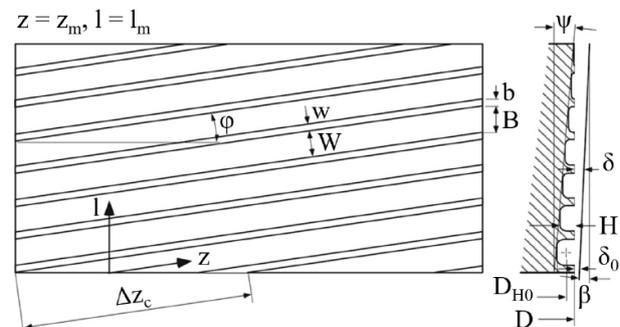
Geometry of the unrolled spiral mandrel with design parameters.
